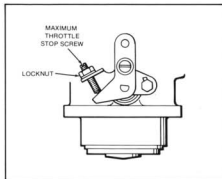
PSU INJECTION PUMP STOP SCREW
